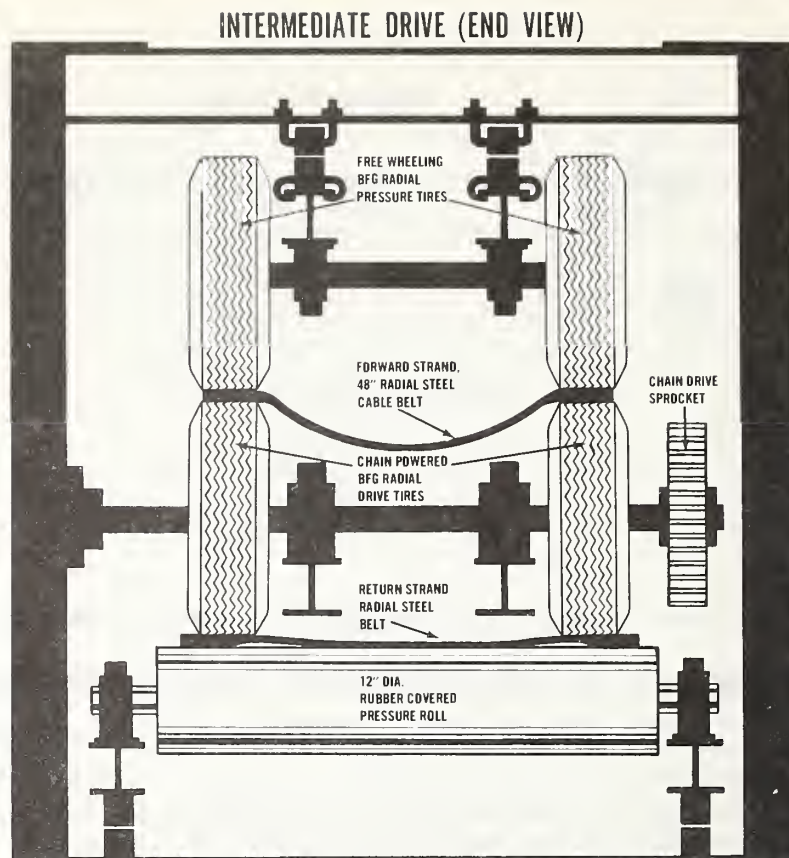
T-T TYPE INTERMEDIATE DRIVE FOR BELT CONVEYOR
